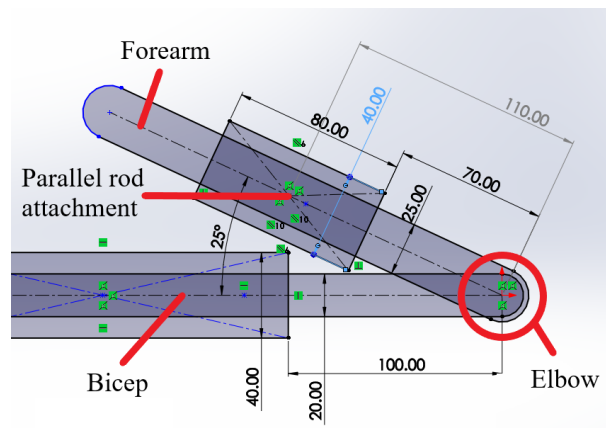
Top view of inner position of arm with parallel rod attachments developed by the company
